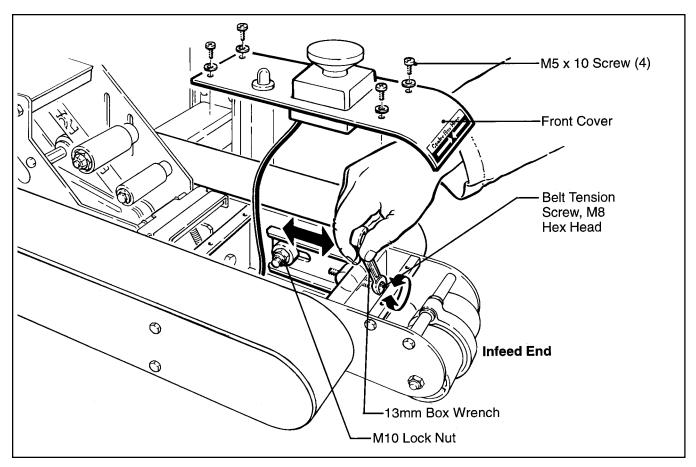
Box Drive Belt Tension Adjustment, Upper Belts (Infeed End)
